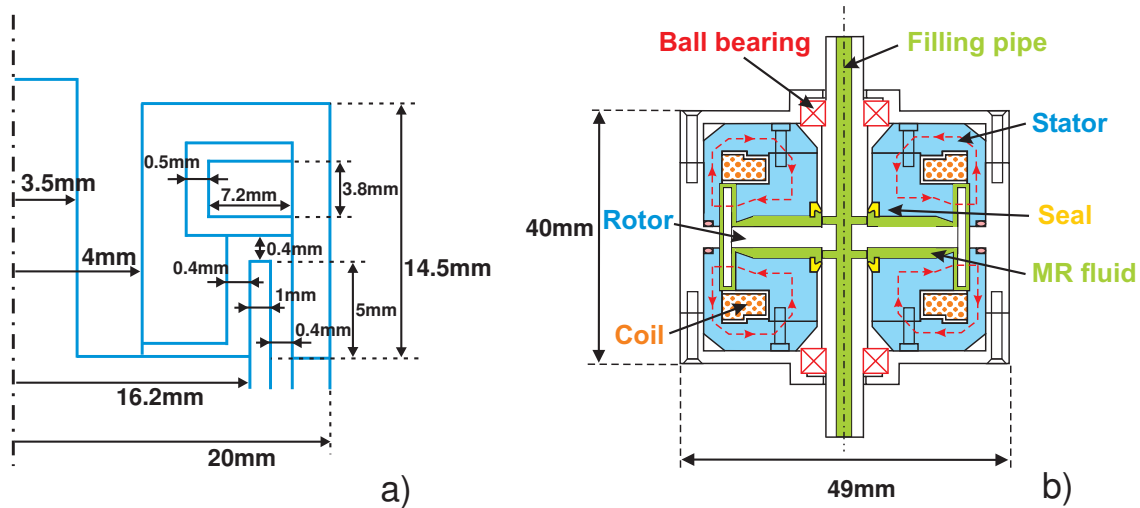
T-shaped rotor brake prototype: a) magnetic core dimensions - b) schematic cross-section
